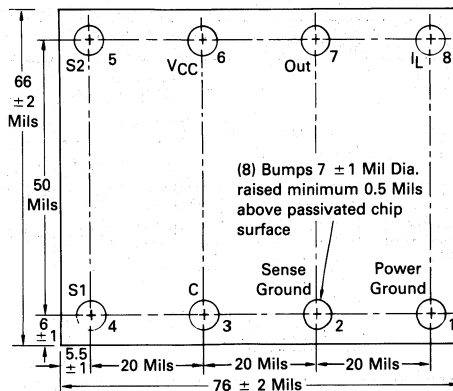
MCCF3334 IGNITION CIRCUIT BUMP SIDE VIEW
